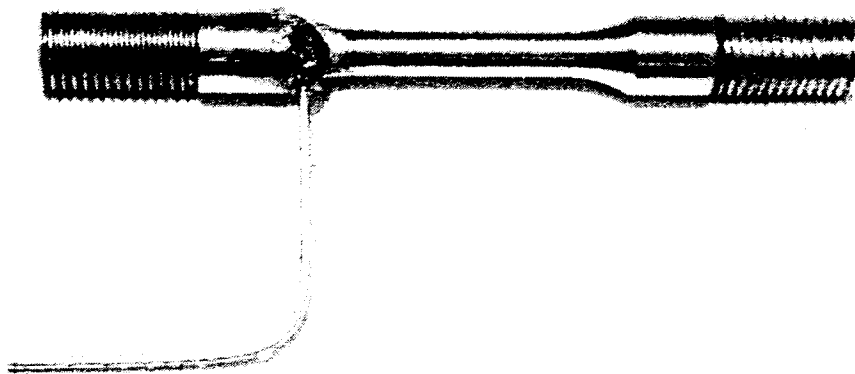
Spot Welded Smooth Tensile Specimen
